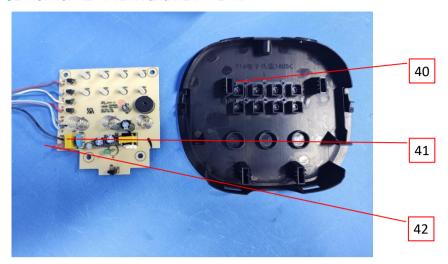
PCB view for NDTFT21R and NDTFT21RH
